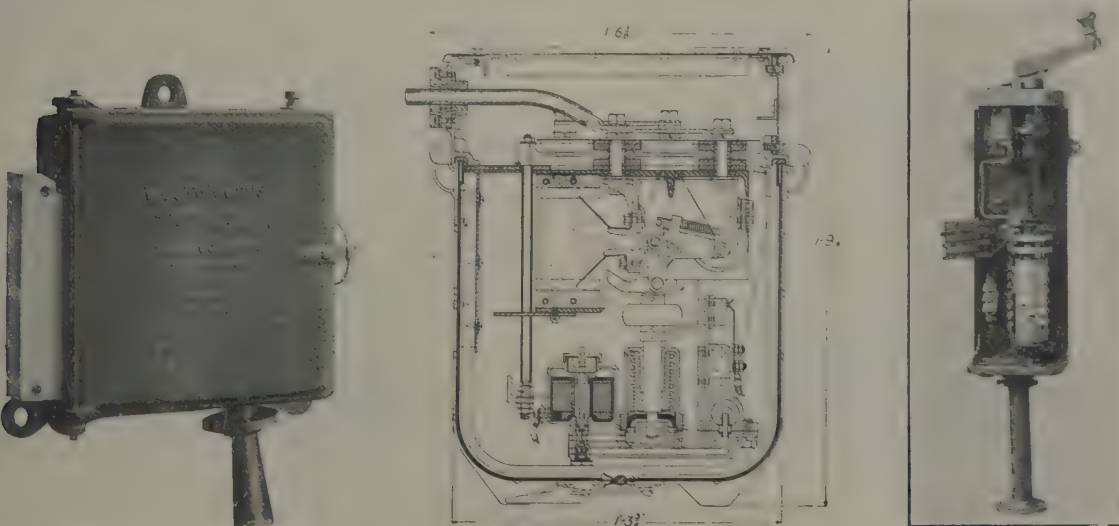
Westinghouse Car Type Circuit Breaker.
